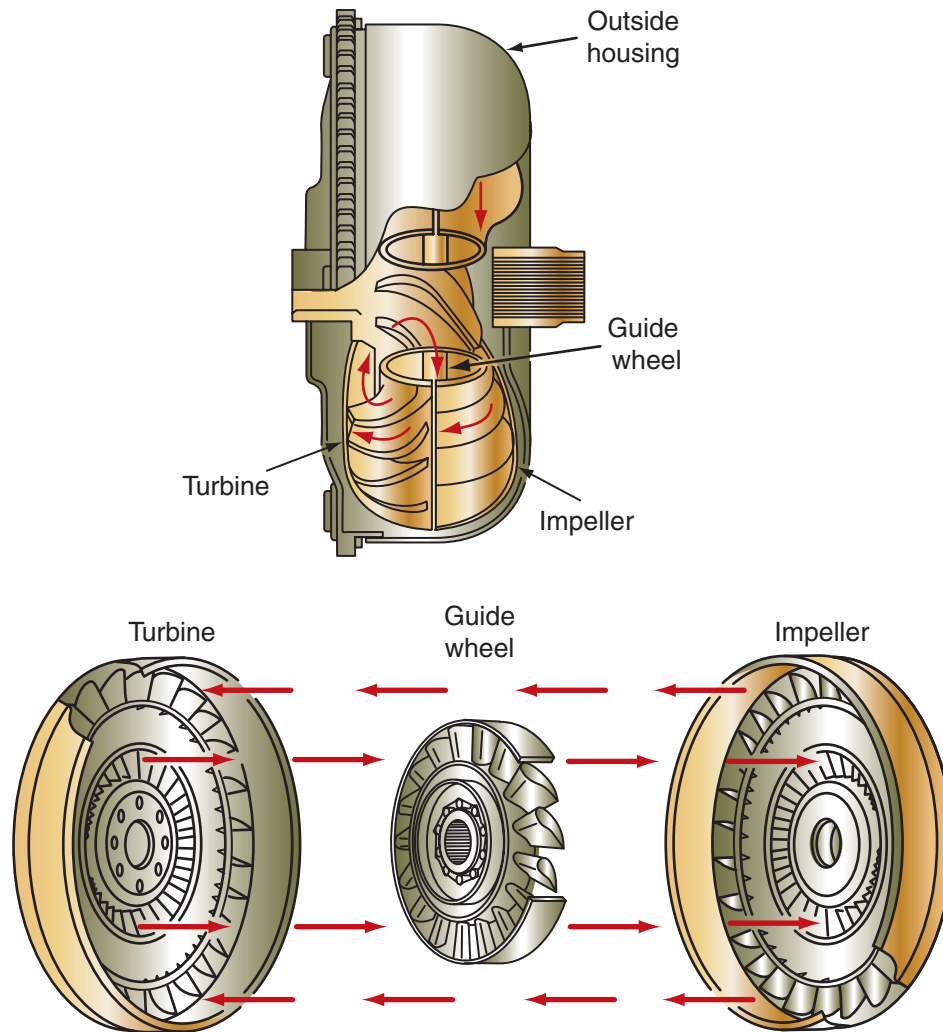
A torque converter's major internal parts are its impeller, turbine, and stator (guide wheel).
